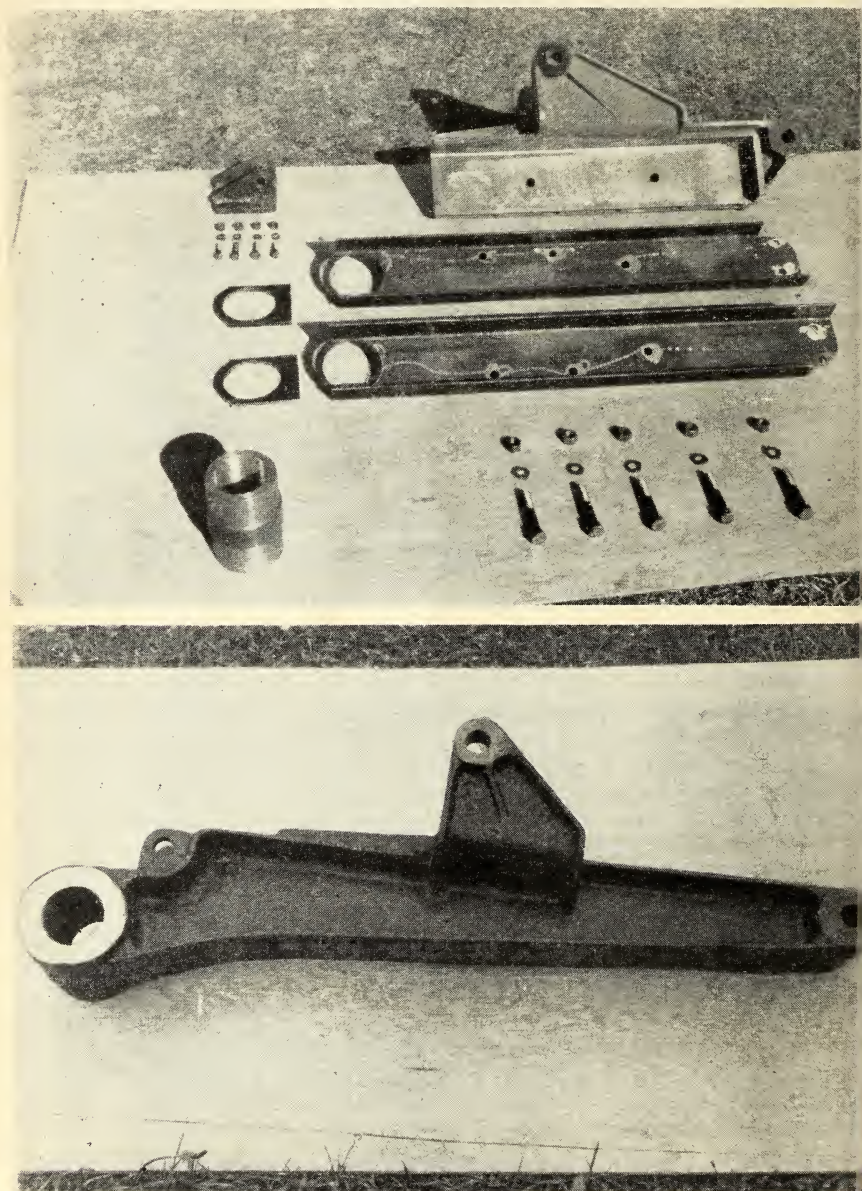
Top*, These 34 parts were formerly required to make up the bearing portion of a hydraulically controlled plow. *Bottom*, This one casting replaces all of the parts in the top photograph. Note smooth lines and minimum machining.
